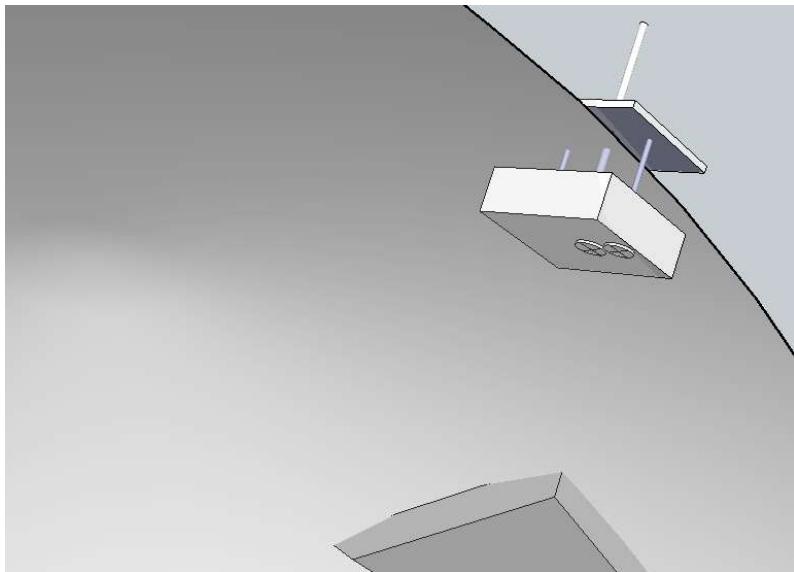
Side view of 3D model of Design 2 placed in context, mounted inside of the water tank
